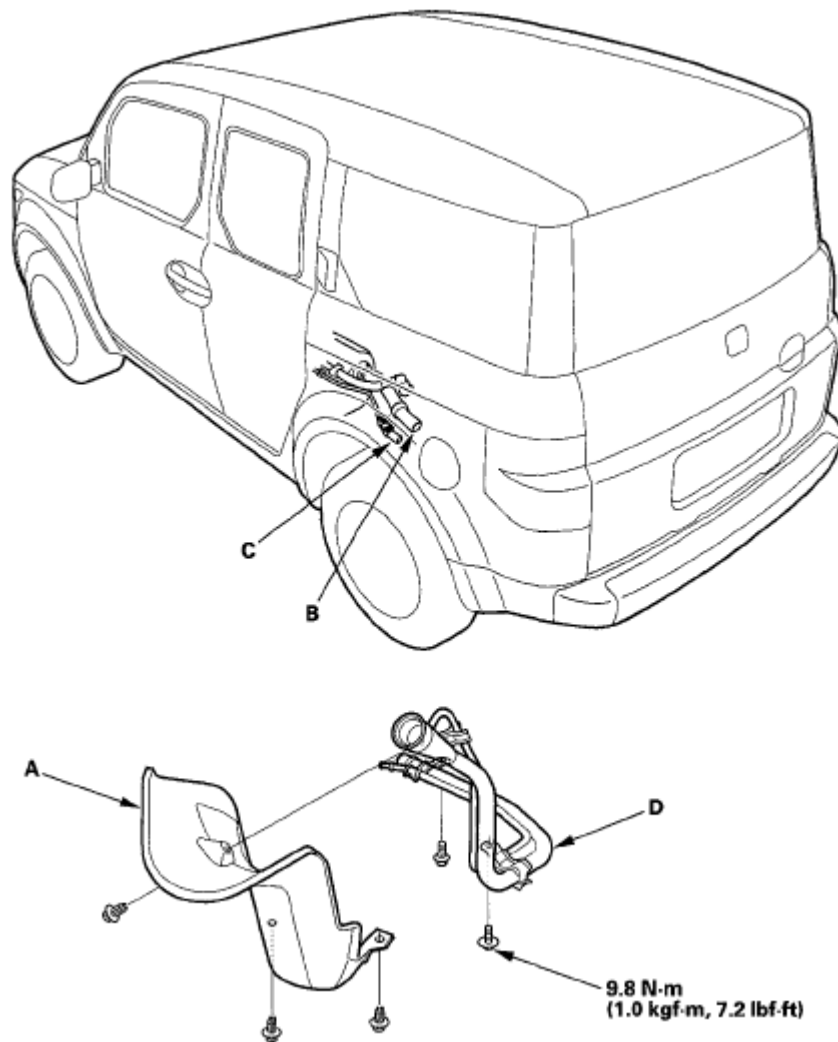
Identifying Fuel Fill Pipe And Parts With Torque Specification
